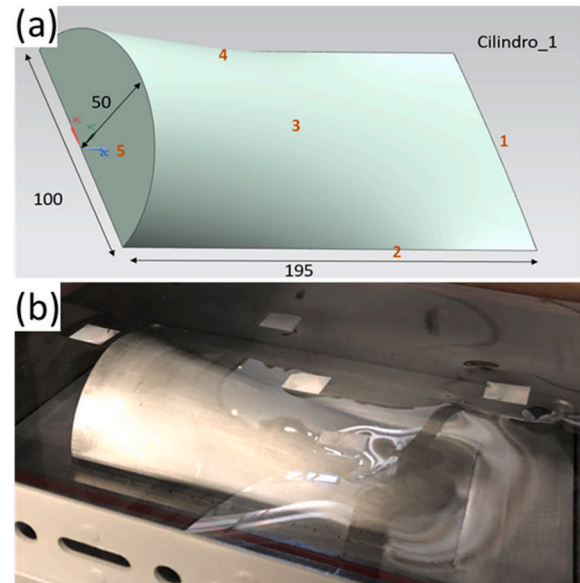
(a) Design of the thermoforming mold geometry showing the placement of the microstructured areas in red. Dimensions are in millimeters. (b) Photograph of the polycarbonate film on top of the mold prior to the thermoforming process. (For interpretation of the references to colour in this figure legend, the reader is referred to the web version of this article.)
